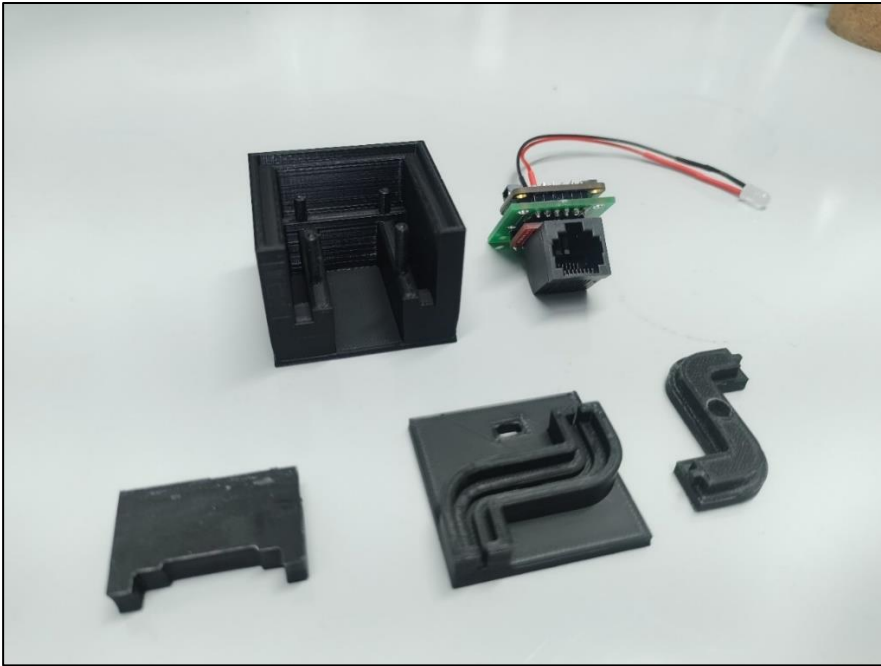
Detector module components ready for assembly. Note - LED soldered in place due to prototype testing. Should not be attached at this stage.
